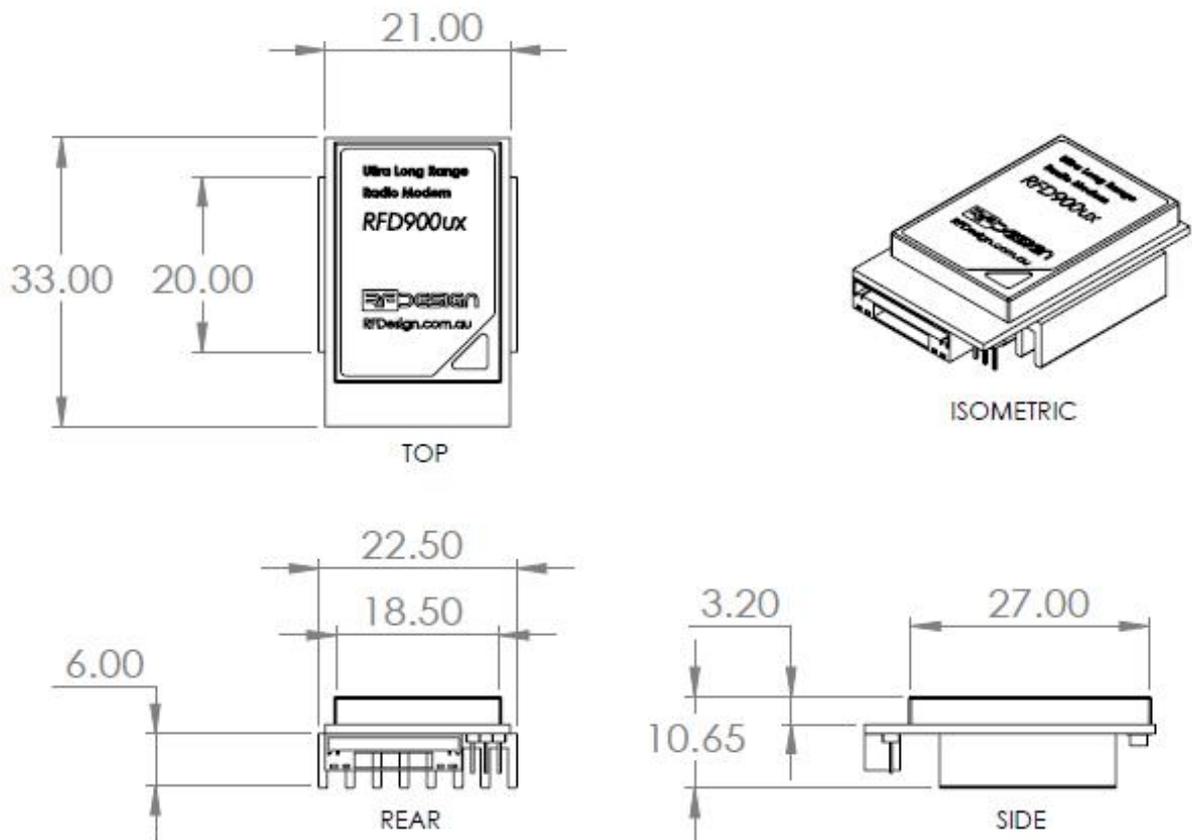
Dimensional drawing of RFD900ux/RD868ux modem
